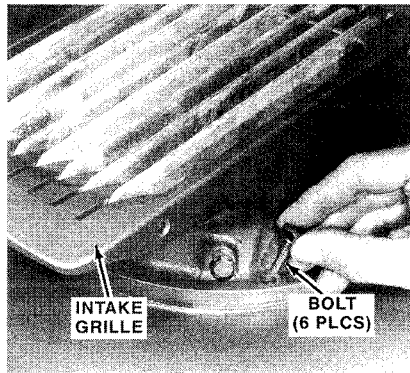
Unbolt and remove the water intake grille for access to the impeller
